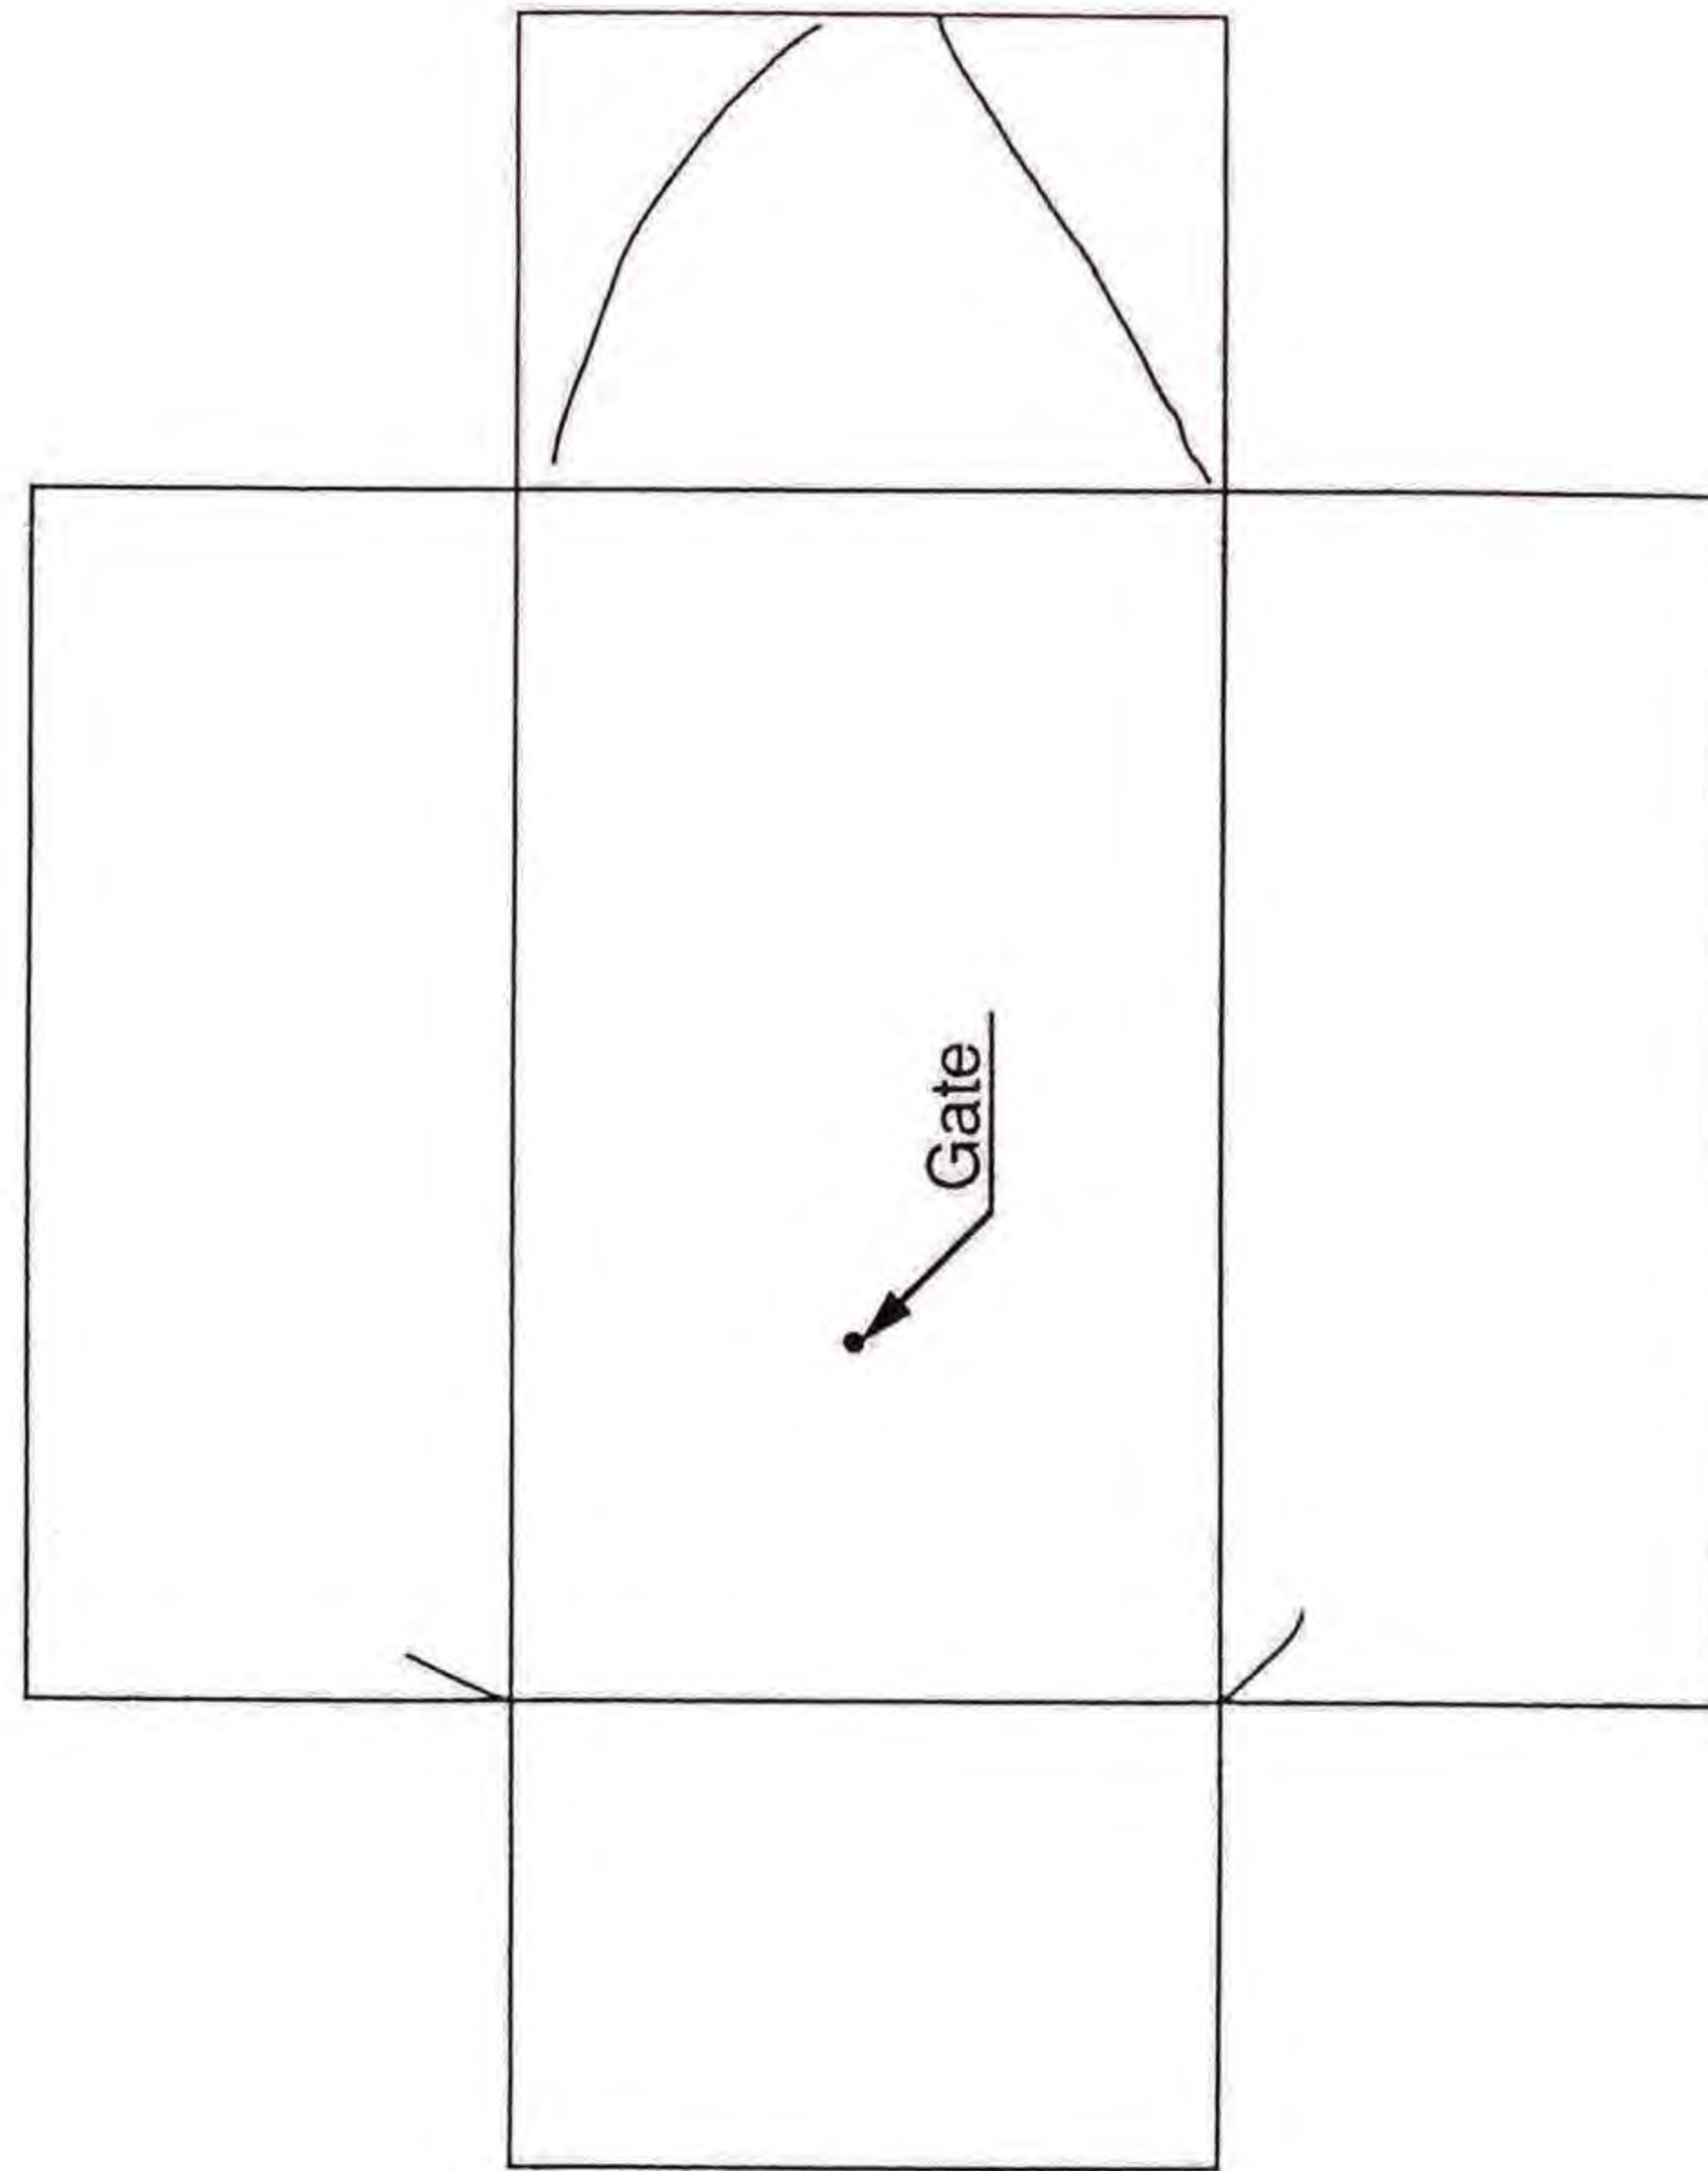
Weld line. (Eccentric distance = 25 mm)
